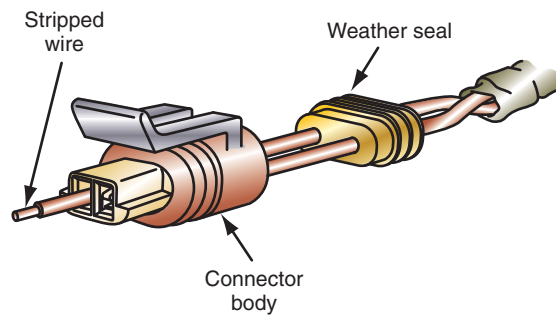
The wire lead must be installed into the seal and connector before attaching the terminal.
